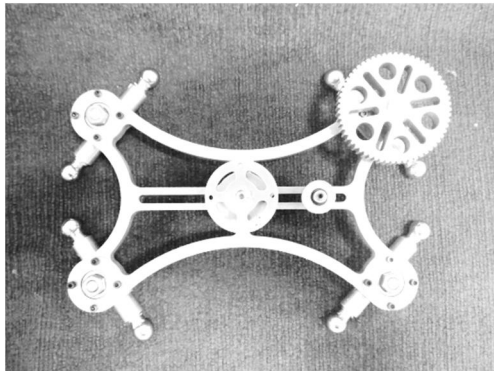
Gear mechanism for 90 to 180 end effector rotation
